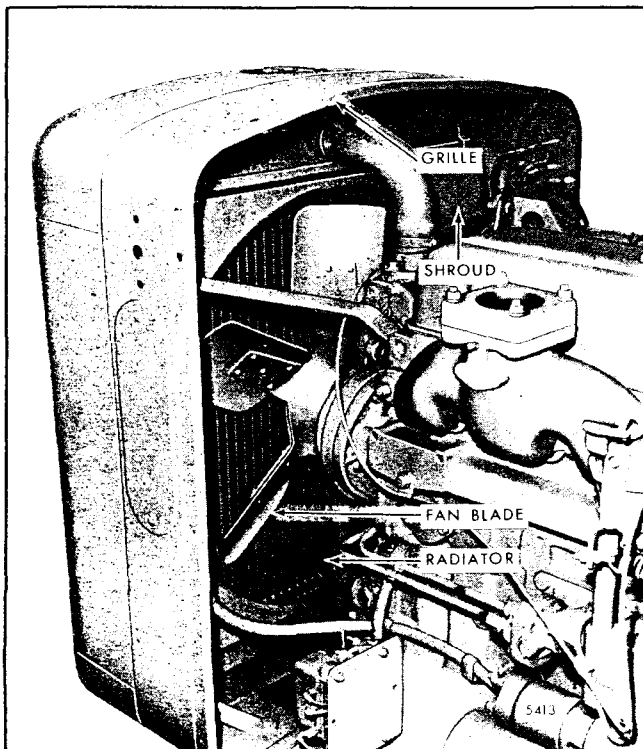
Typical Radiator Mounting (In-Line Engine)
